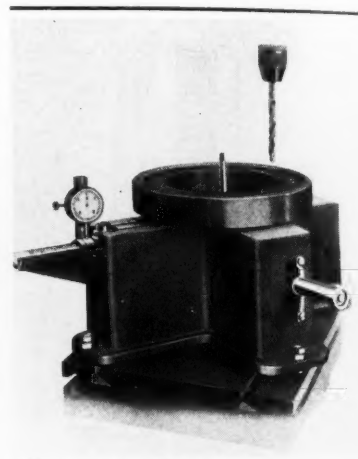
Lever Type of Static Balancer for Light-weight Parts
